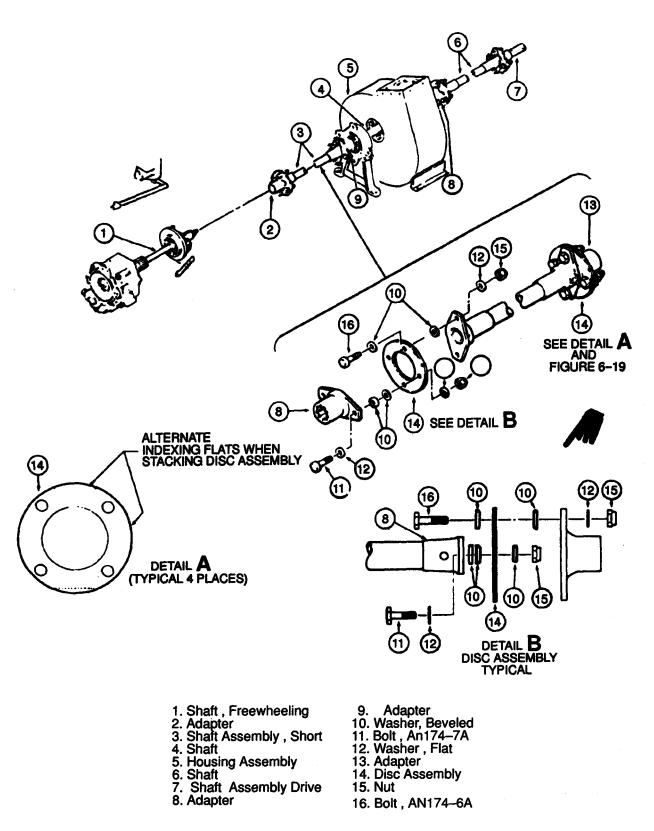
Driveshafts - Tail Rotor (Forward Short Shft Typical (Sheet 1 of 2).
